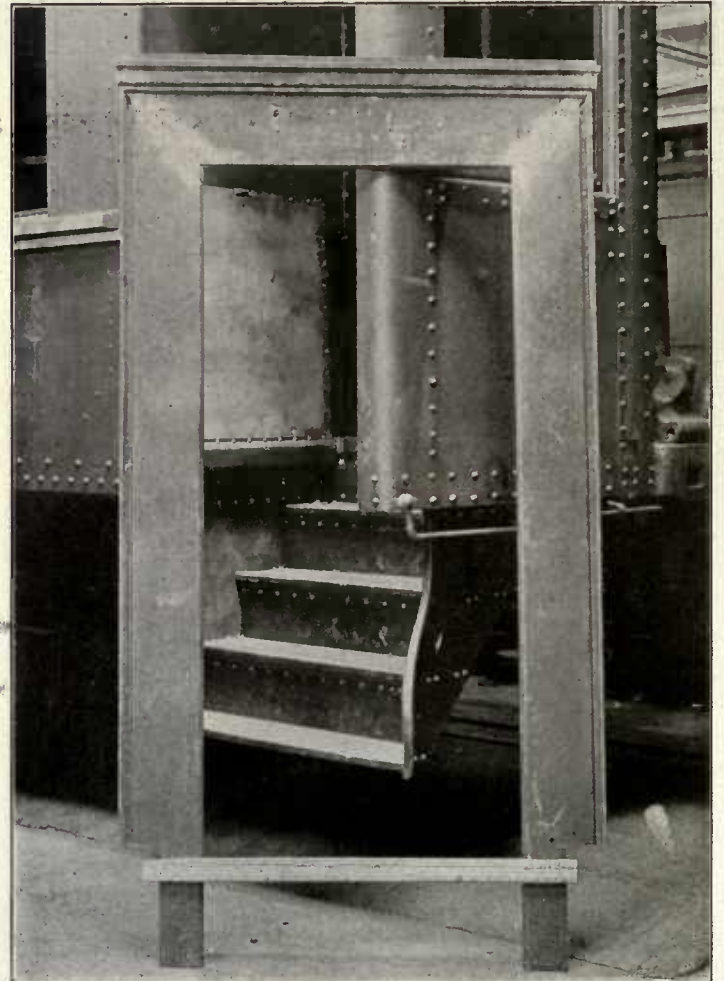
Door Frame for Steel Coach Made in One Piece by Oxy-Acetylene Welding.
